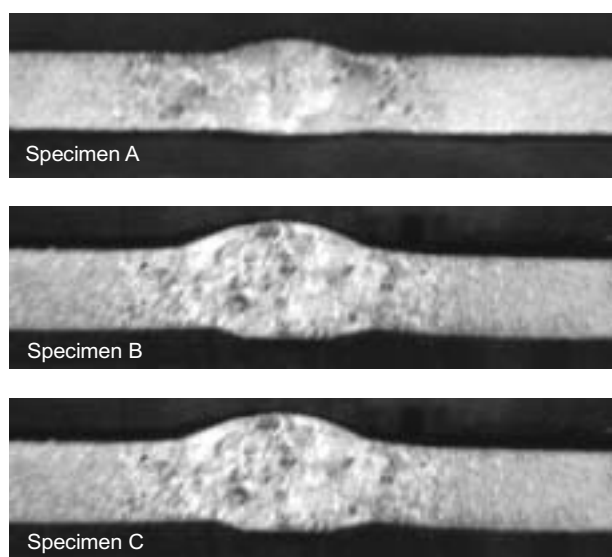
Weld seam macrostructure of C. P. Ti welding specimens
